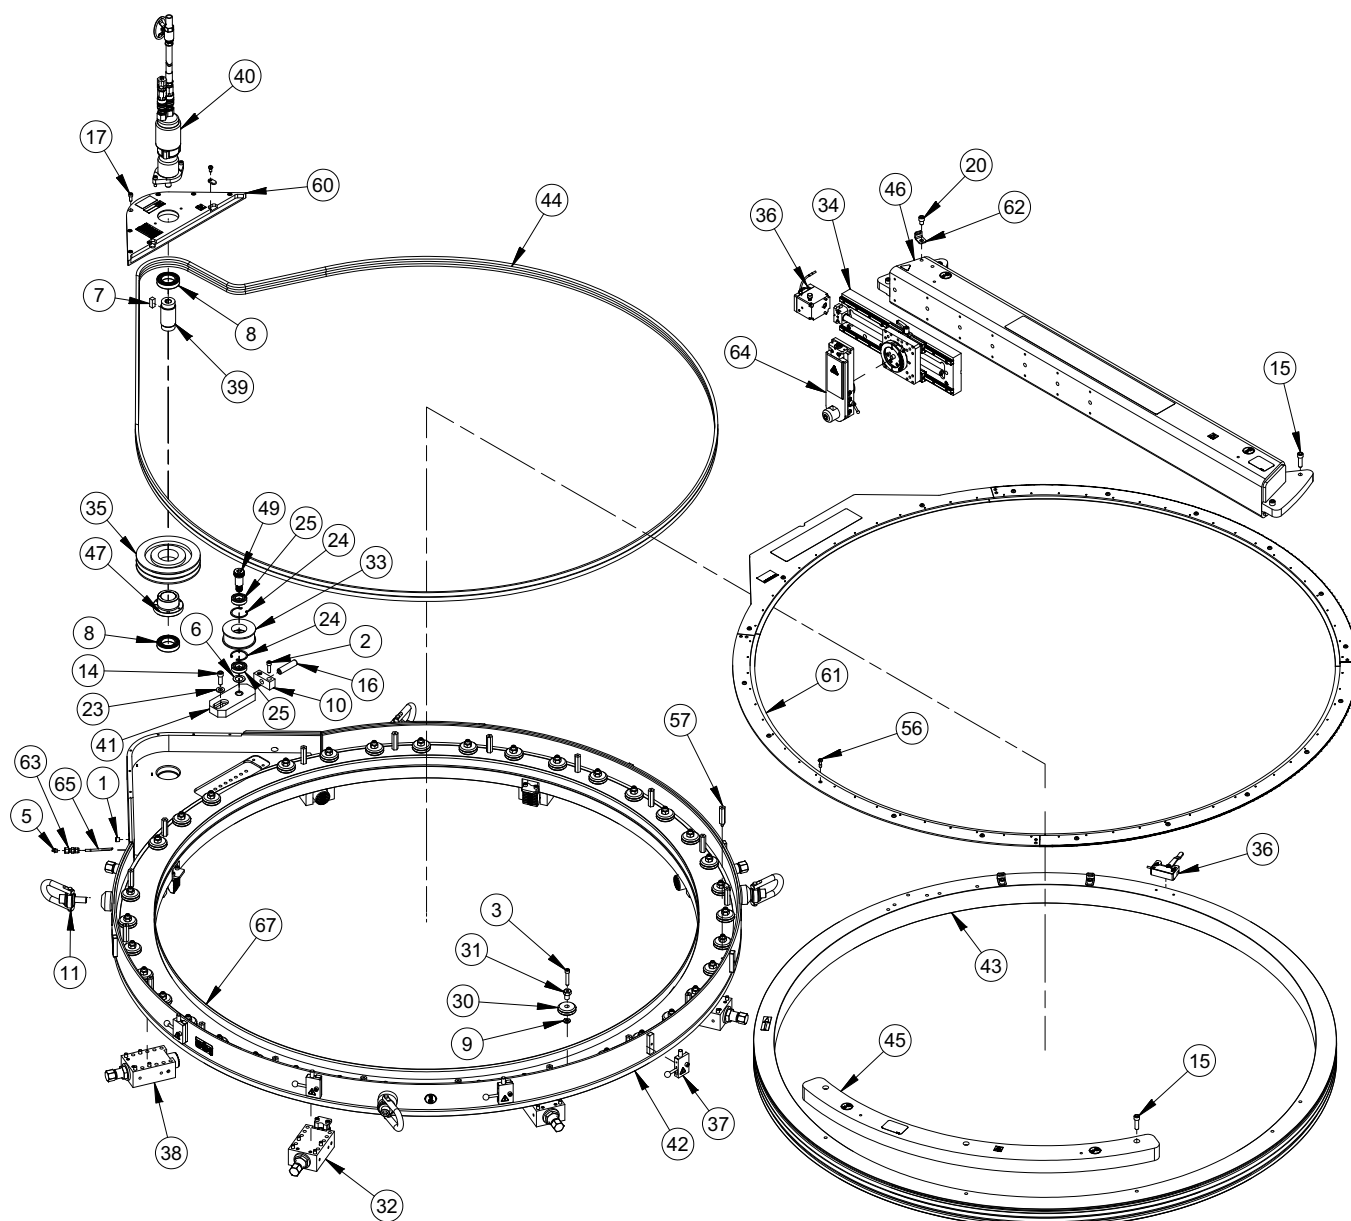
ODF70 SPEED FACER ASSEMBLY (P/N 87000)
